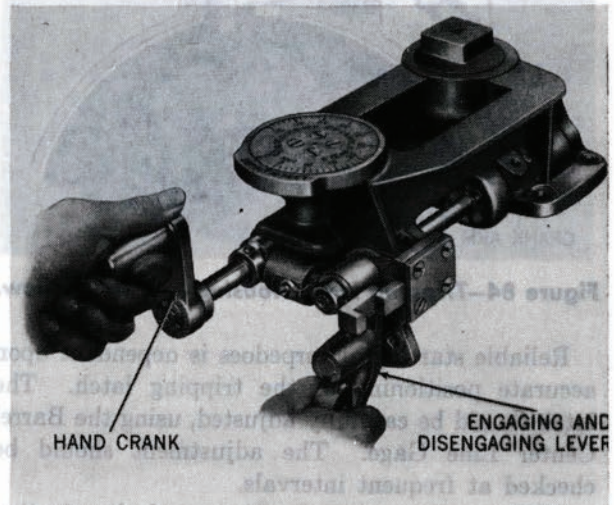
Engaging Lever Ready To Be Moved to Spindle IN.
